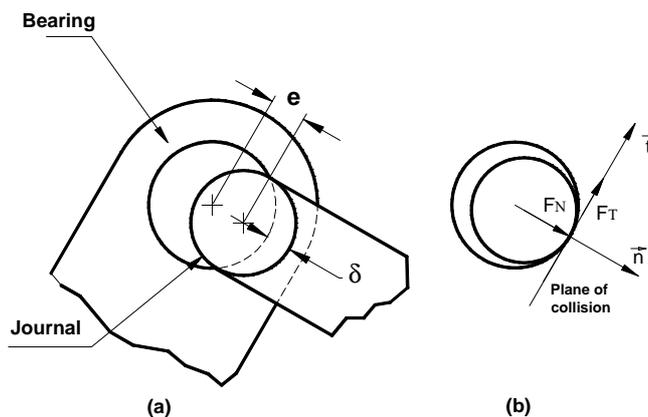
(a) revolute clearance-joint (b) joint contact forces [13, 14]
